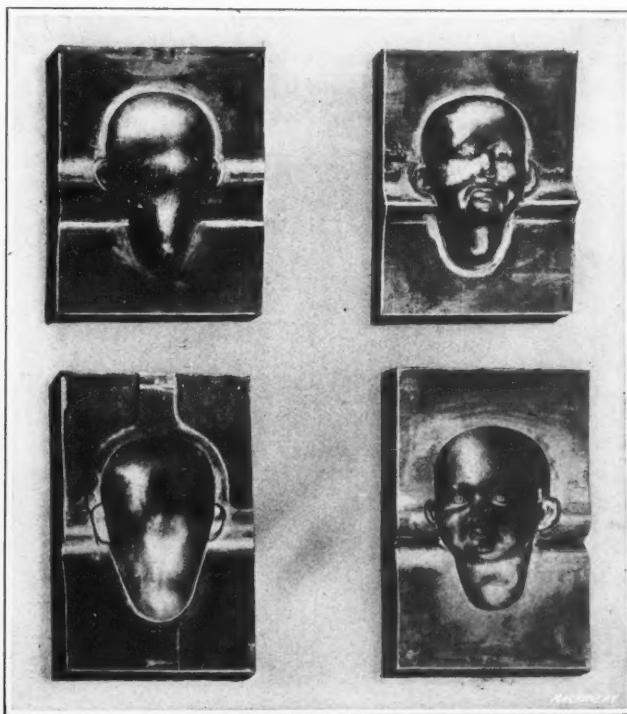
Dies for making Head of Doll. Work of this Character is easily handled on Machine
